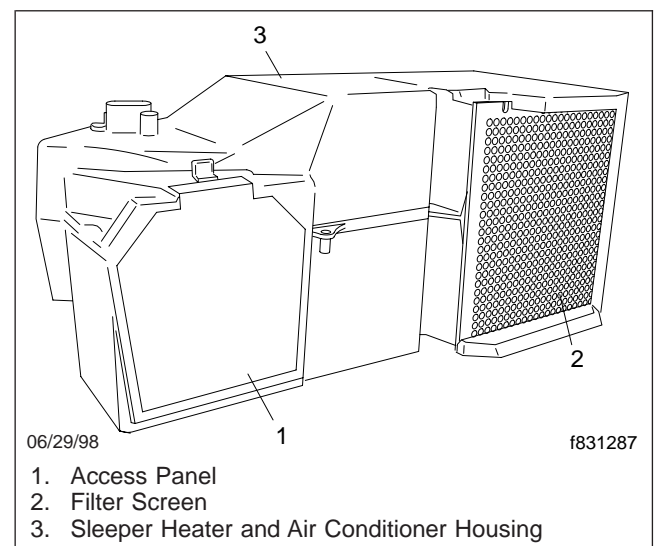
, Sleeper Heater and Air Conditioner Housing With Recirculation Filter
